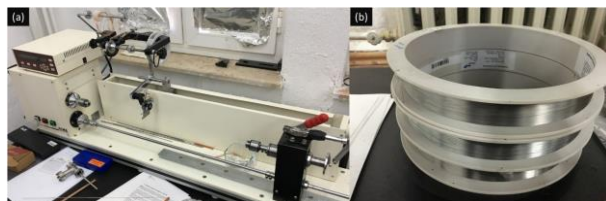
ACME AE-X Coil winding machine and molybdenum coil. (a) Coil machine, (b) Molybdenum coil.
